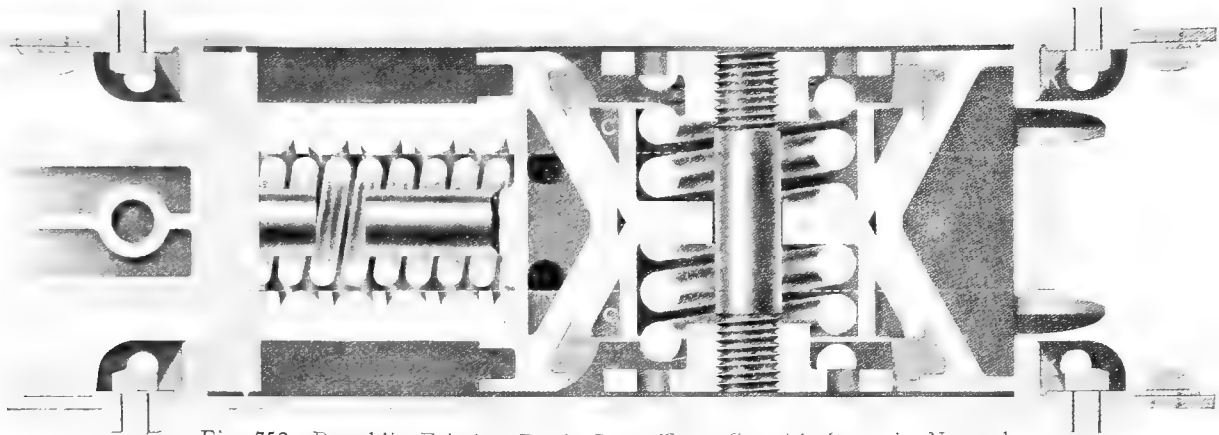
Republic Friction Draft Gear, Type G, with Parts in Normal Position. Western Railway Equipment Company.
